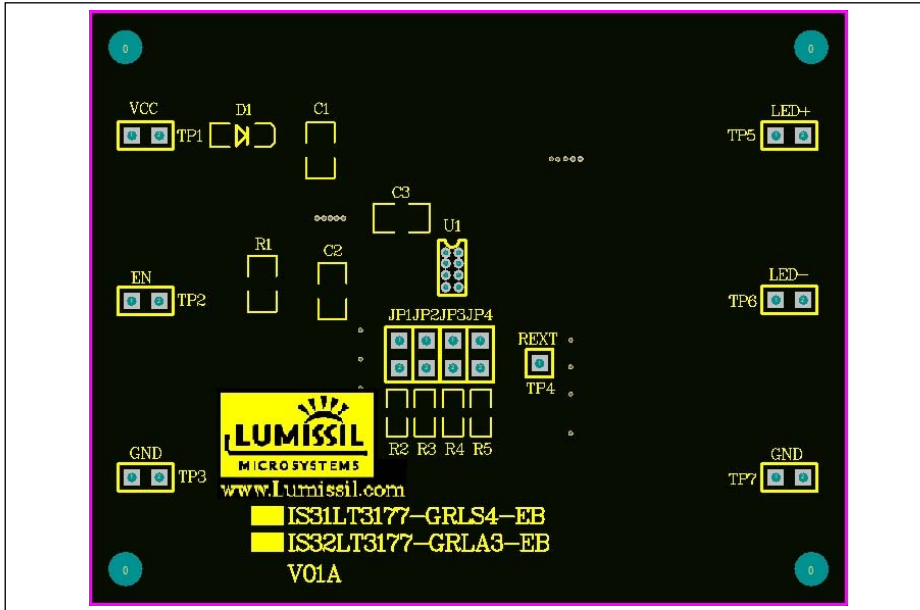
Board Component Placement Guide - Top Layer (SOP-8-EP)
